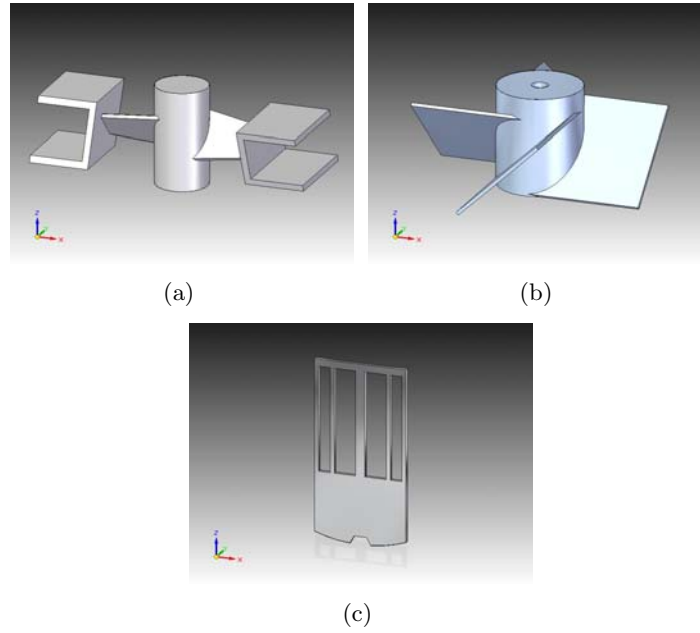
Axial impellers used in this work, a) Intermig impeller, b) Pitched Blade Turbine, c) Maxblend impeller. The impellers dimensions are presented in Table 1.1.
